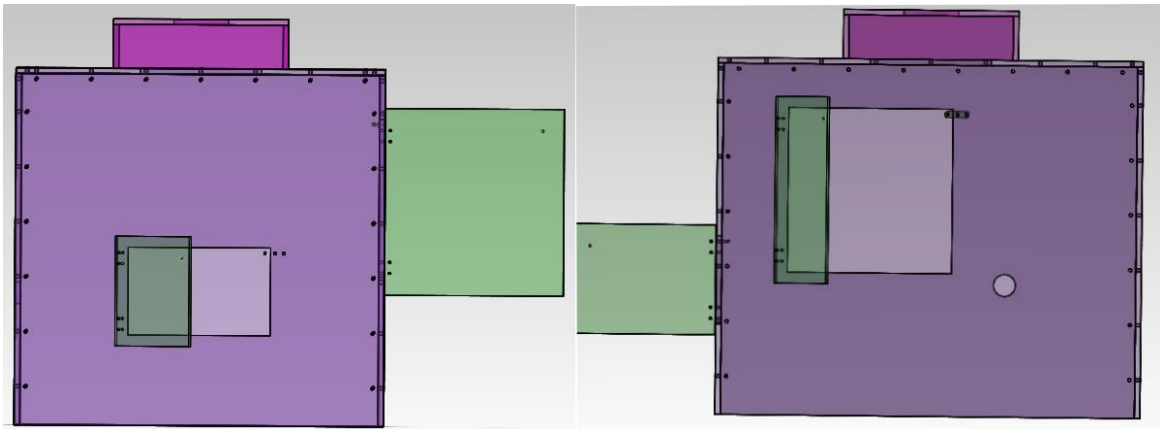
Front Box View Prototype (Left) - Right Box View Prototype (Right)
